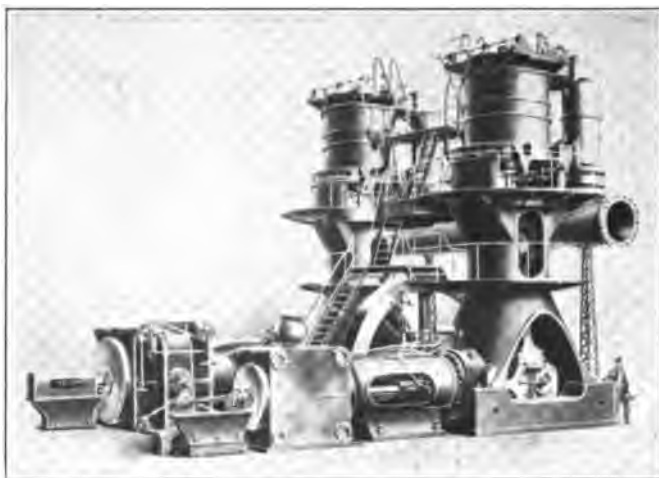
Horizontal-vertical cross-compound, 52 in. and 90 in. steam, 90 in. and 90 in. air x 60 stroke blowing engine the Wm. Tod Co.
